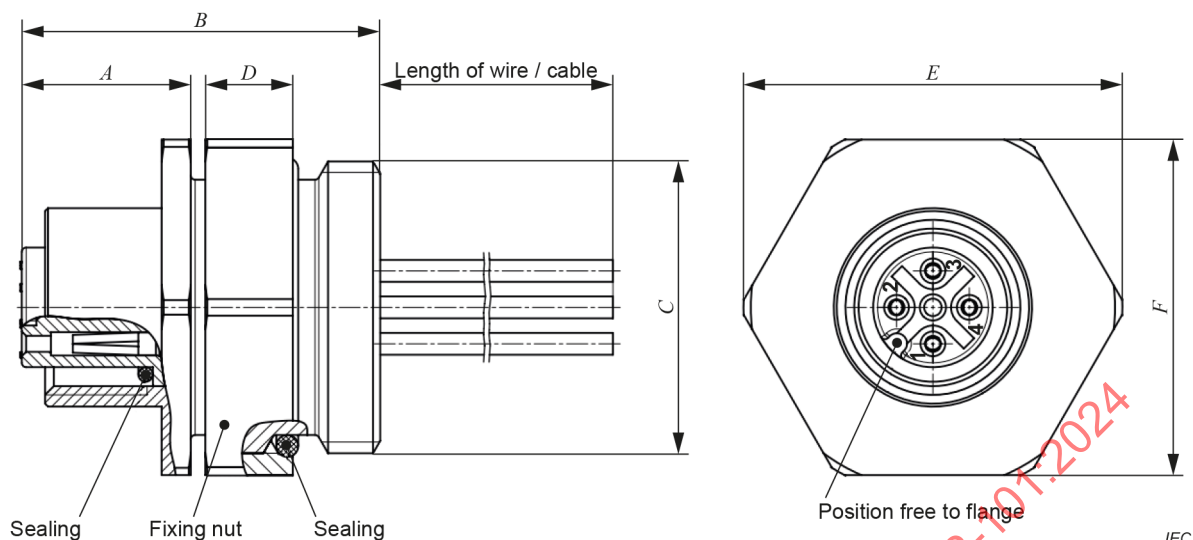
Fixed connector, female contacts, with wire / cable, single hole mounting thread M20 × 1,5, mounting orientation
